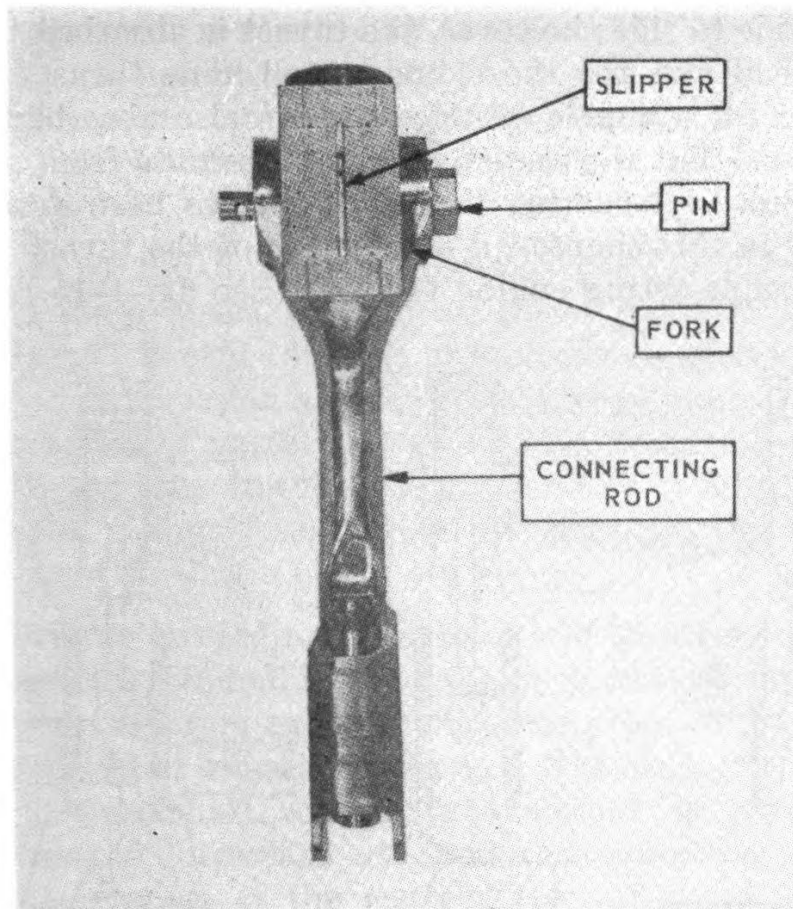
Forked type connecting rod with crosshead (Hamilton).
